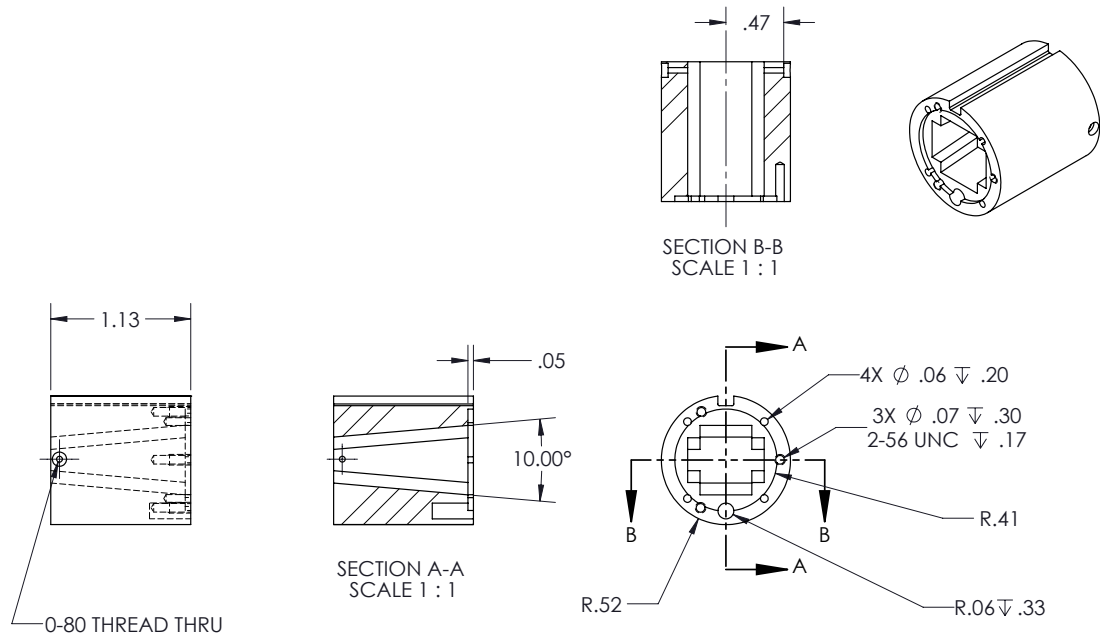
Technical drawings of CBH. The piece was fabricated using a 3D printer. The tapered slot allows CB to pitch through a range of angles.
